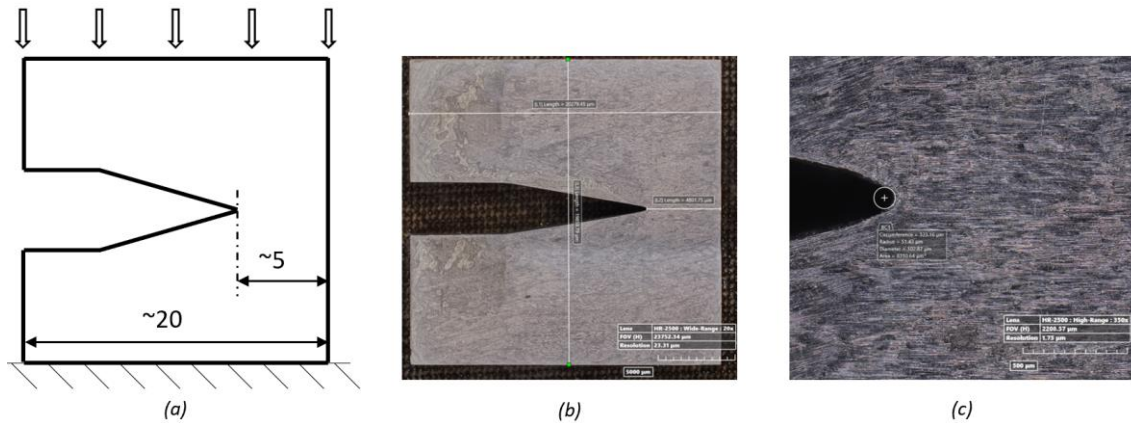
Small scale specimens manufactured: (a) nominal dimensions and loading scheme, (b) actual specimen microscopy with dimensions, (c) detail of the notch tip.
